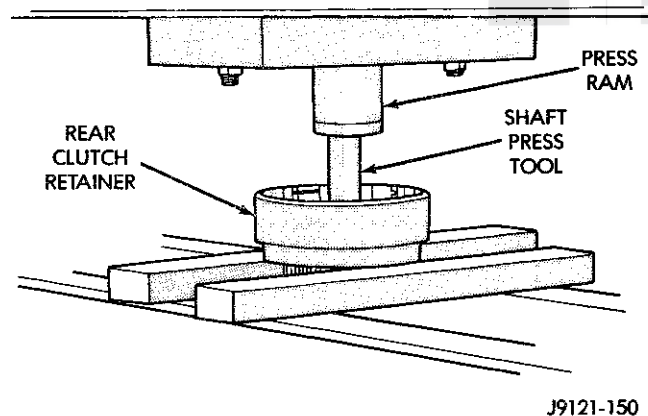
Pressing Input Shaft Out Of Rear Clutch Retainer
